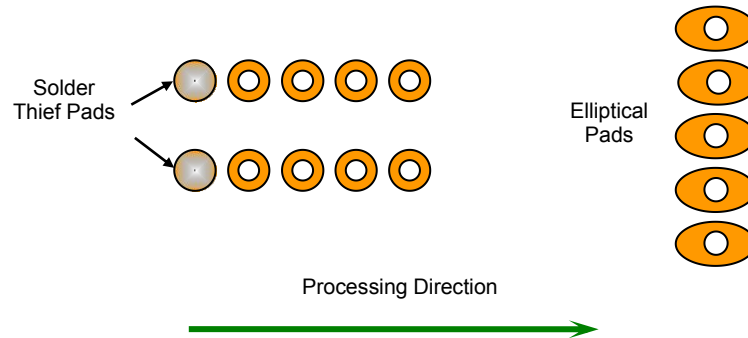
Solder pad alignment relative to board's direction of travel through the wave soldering equipment.
